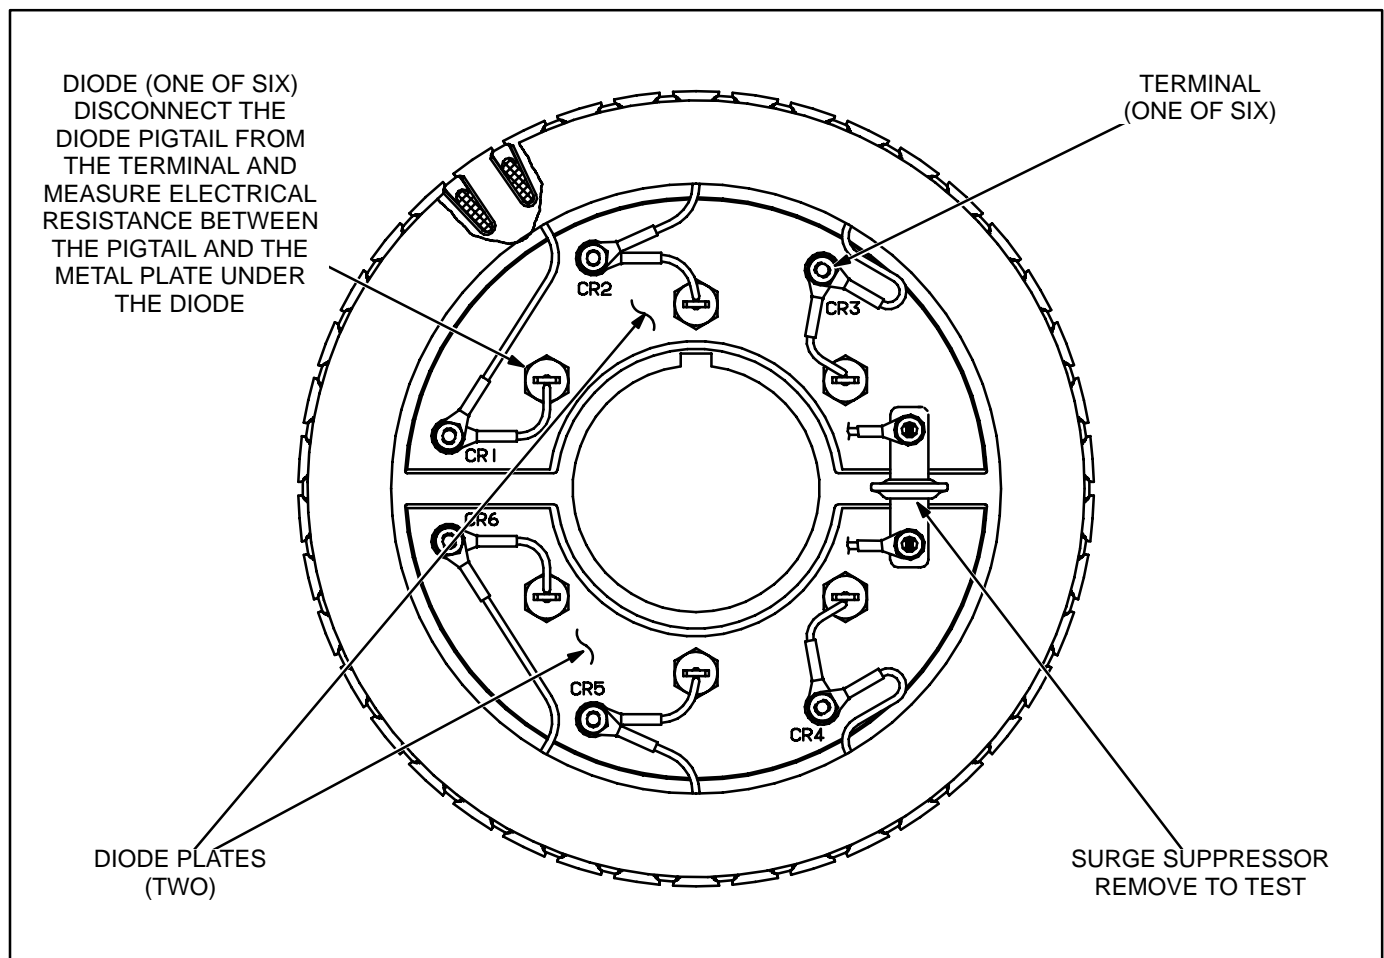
TESTING THE ROTATING RECTIFIER ASSEMBLY
